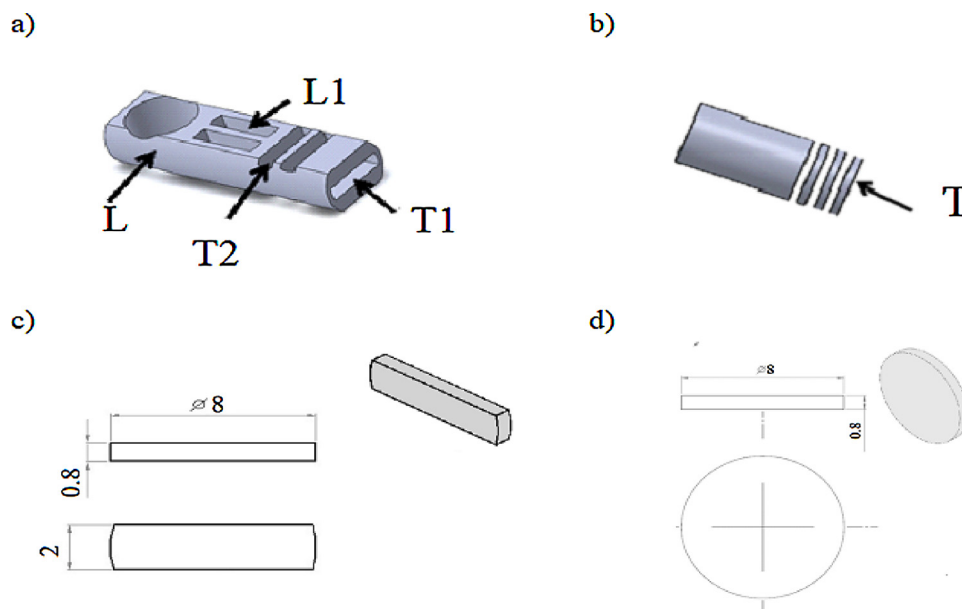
Scheme of cutting of specimens: (a) general view of HE8F rod, (b) general view of HE8 and Fe20 rods, (c) draw of mini-beams, (d) draw of mini-disc.
